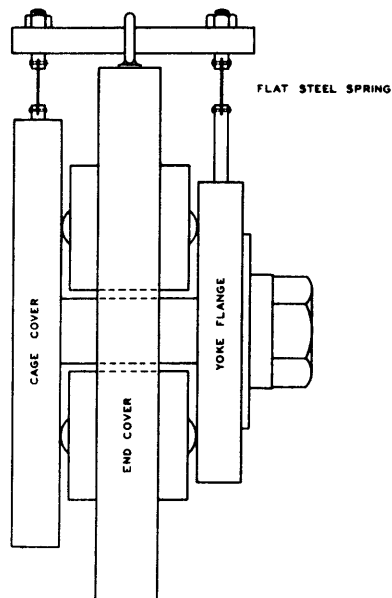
Sketch showing method of spring support to carry weight of cage cover and yoke assembly.
